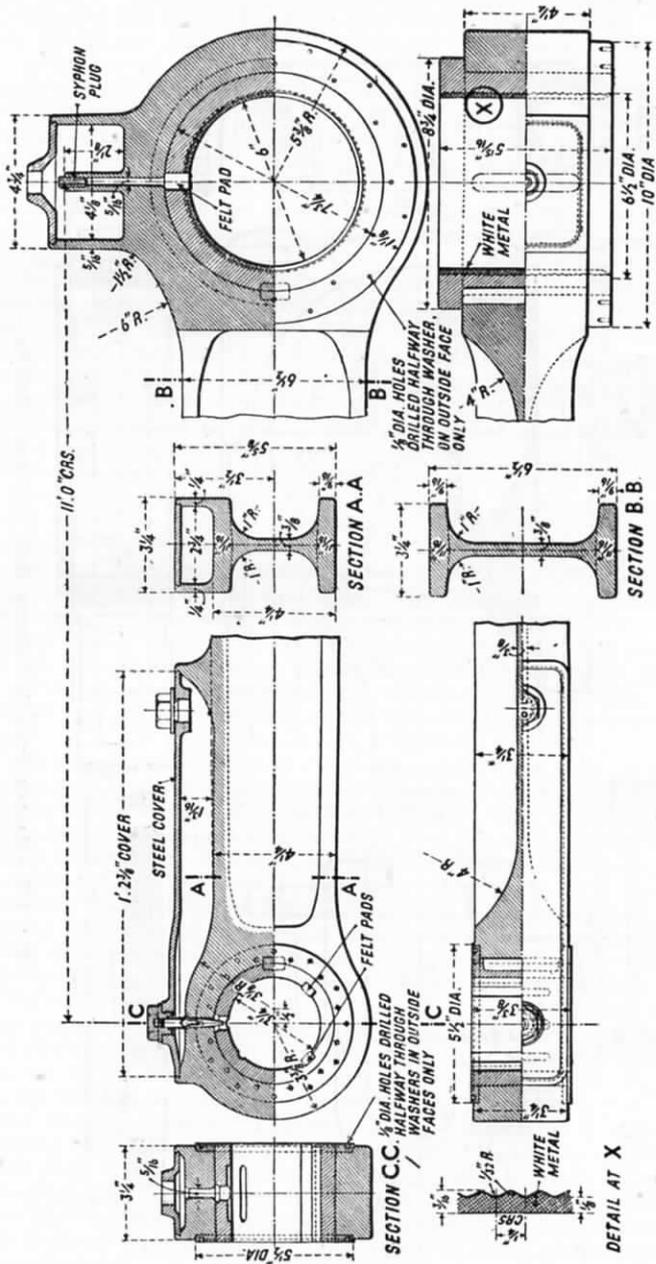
OUTSIDE CONNECTING ROD OF FOUR-CYLINDER EXPRESS ENGINE, 4-6-2 TYPE, L.M.S.R.
